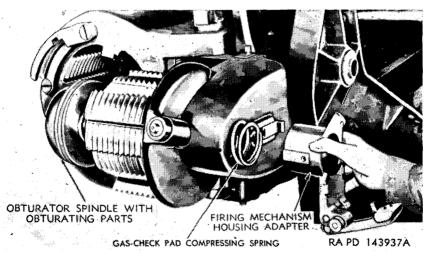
Removing or installing firing mechanism housing adapter, gas-check pad compressing spring, and obturating parts.
